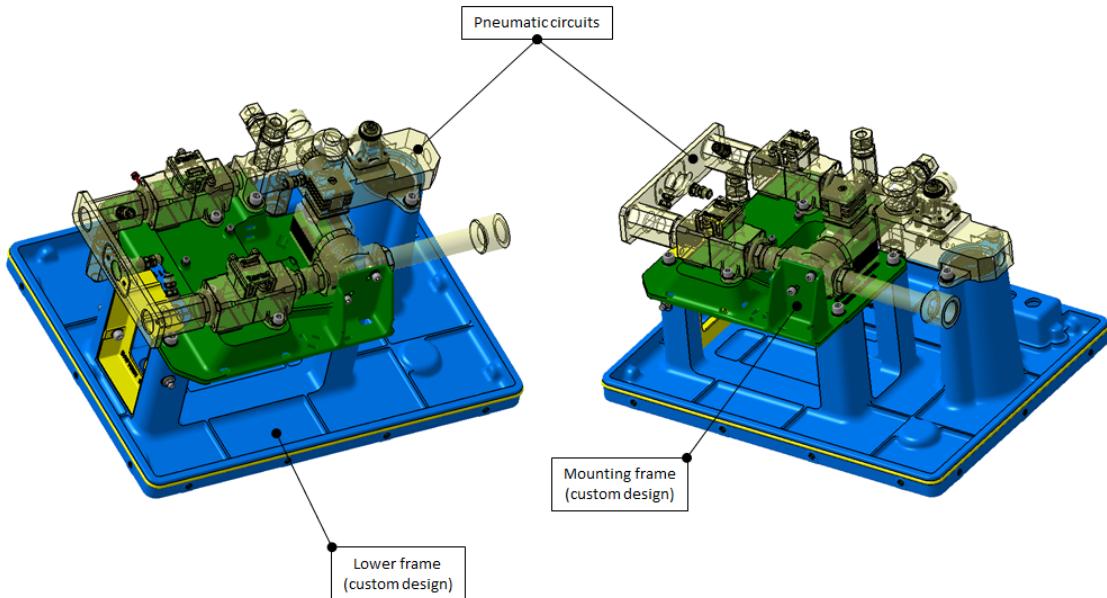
Pneumatic layout mounted on a custom plastic frame.
